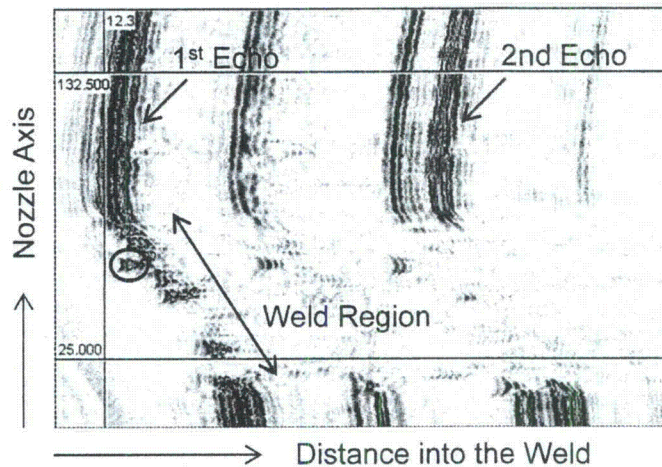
B-scan Side View of the Front Surface Echo Showing Surface Profile Distortion Due to Welding and Cooling at the 174-Degree Circumferential Position. The horizontal axis represents approximately 20 mm (0.8 in.) in metal and the vertical axis 155 mm (6.1 in.).
